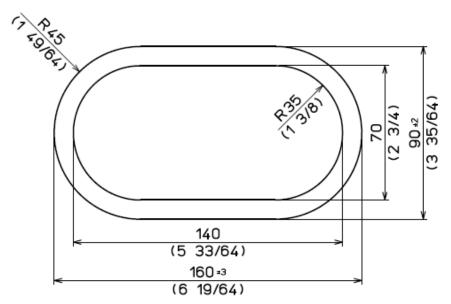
Outline dimensions of a transducer (TD-501C/TD-501B/TD-75/ TD-2001D)
